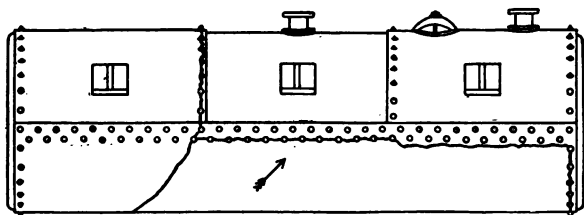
SHOWING LINES OF FRACTURE IN A SINGLE-SHEET BOILER.
